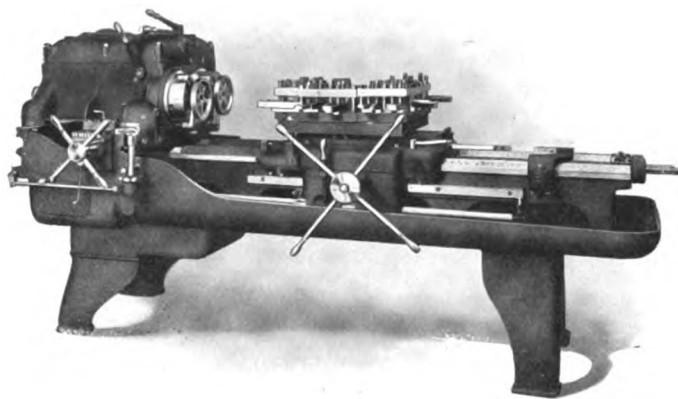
Double Spindle Hartness Flat Turret Lathe with Chucking Equipment
